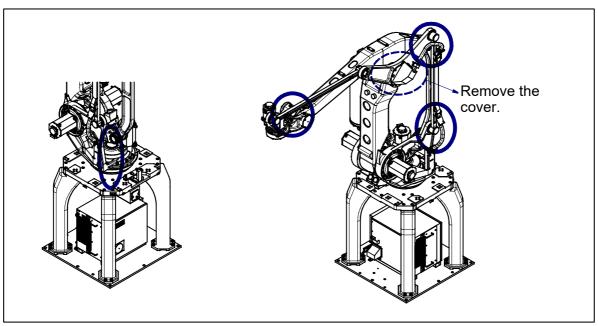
(a) Inspection points of the mechanical unit cables
